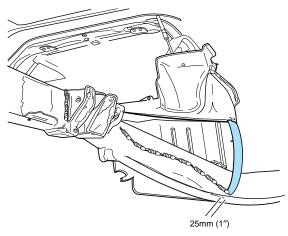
Cut Panel to Create 25mm (1") Flange
